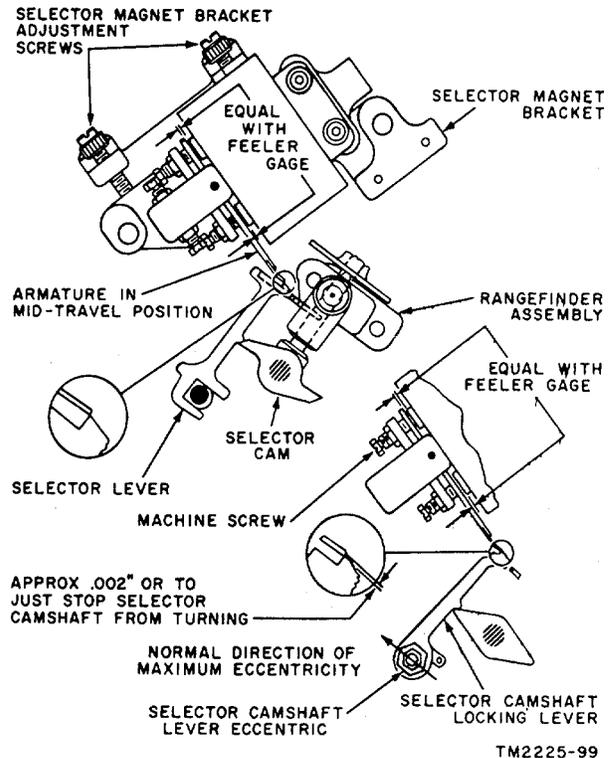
Selector lever and armature alignment and selector camshaft lever eccentric adjustment (TT-76/GGC).
